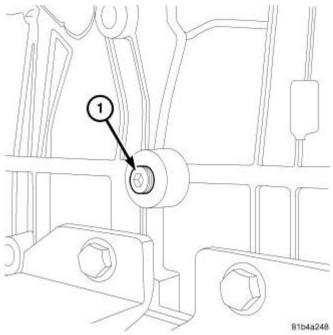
CRANKSHAFT LOCK PLUG LOCATION Courtesy of CHRYSLER LLC
